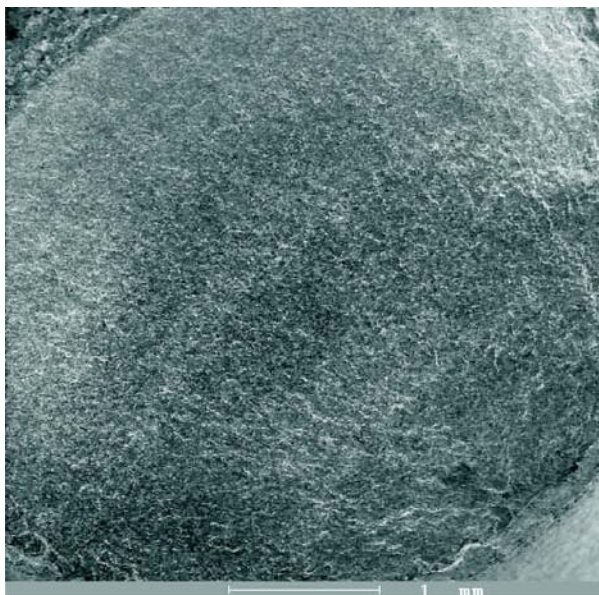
Fracture surface of S355J0 steel with WC coating,
